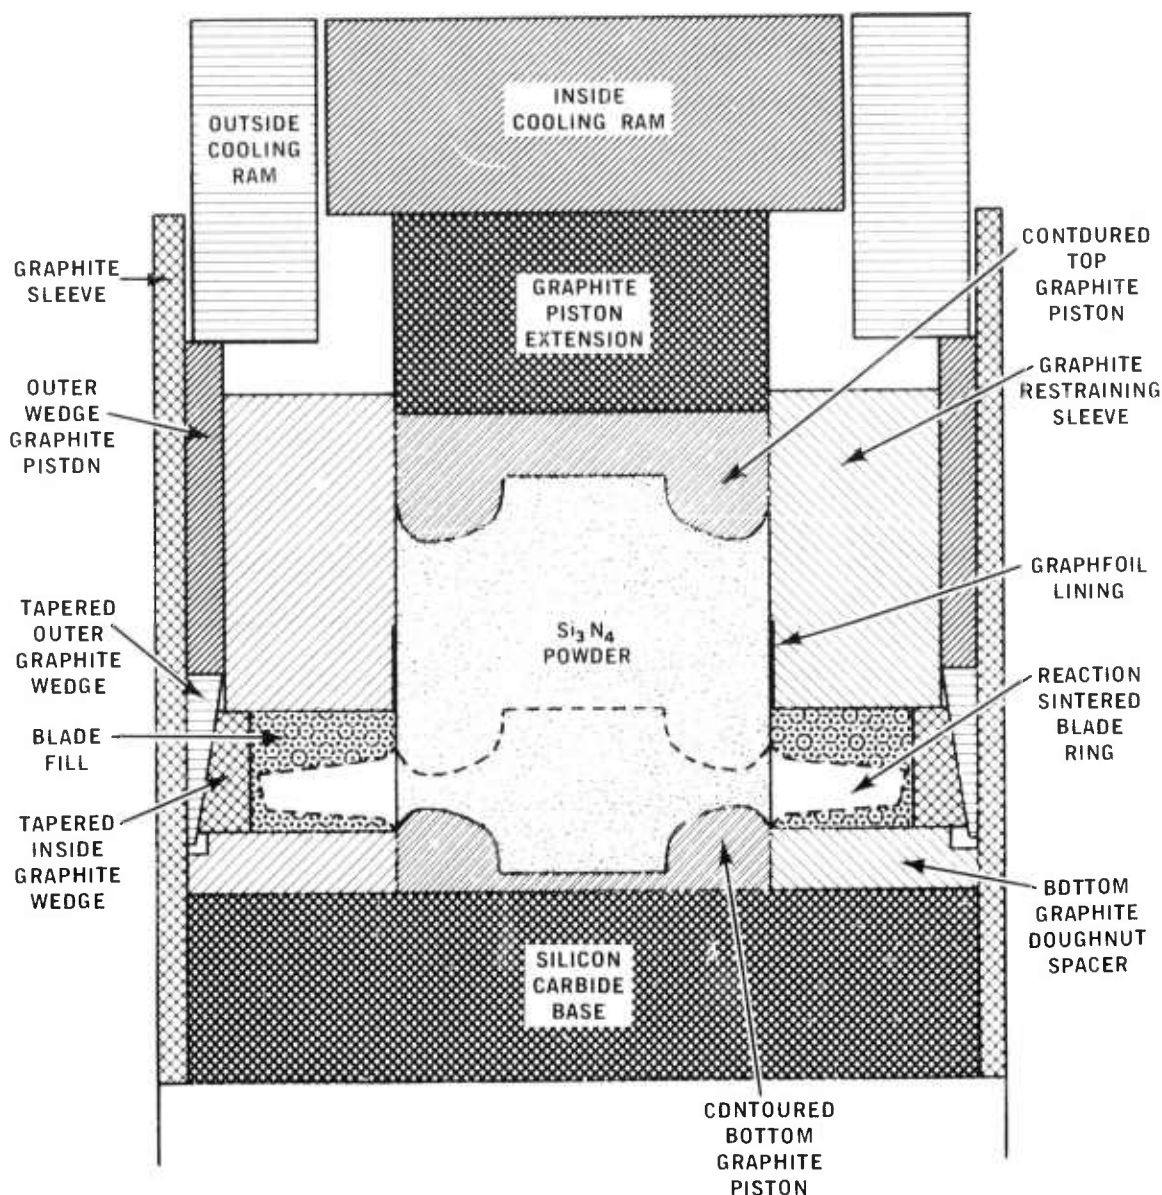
Hot Press Bonding Assembly for Simultaneous Forming and Bonding a Silicon Nitride Rotor Hub to a Blade Ring
